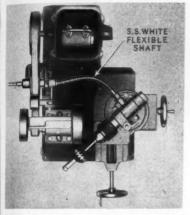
Transmitting Power at an Angle. Here is a plan view of a valve grinding machine, in which a flexible shaft is used to insumit power to a spindle which, to accommodate the various sizes of work, may be moved in any one of three directions.
